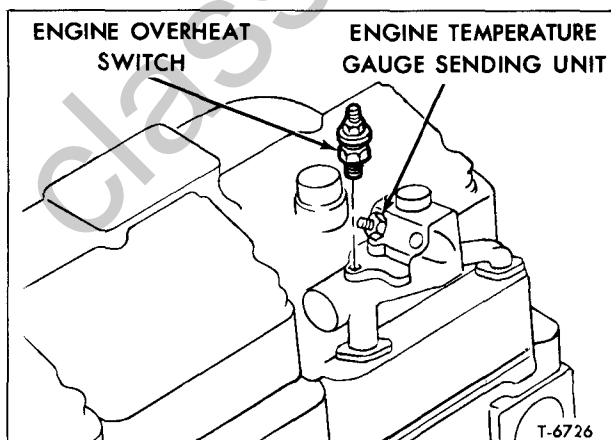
Temperature Gauge Sending Unit and Engine Overheat Switch (Cummins Diesel Engine)
